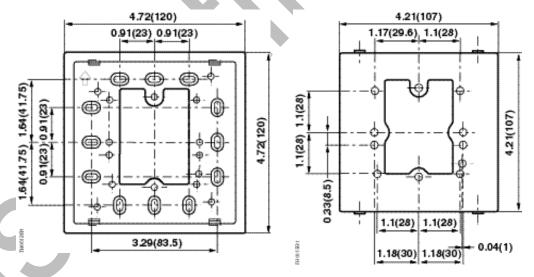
ARG70 Dimensions in Inches (Millimeters).
